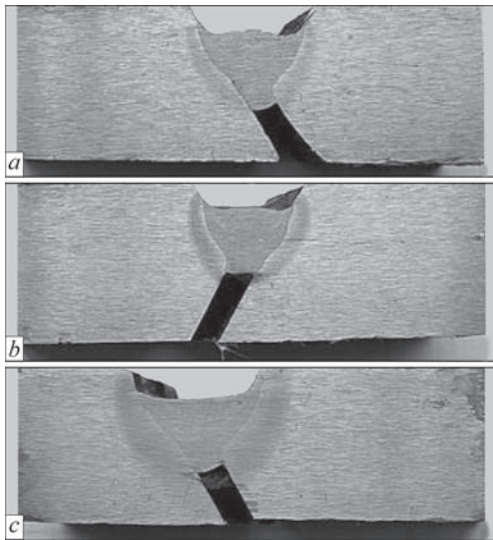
Macrosections of welded joints of Tekken samples of 06G2BDP steel, produced: *a* — with the solid-section NiMo1-IG wire in a gas mixture of 82 % Ar + 18 % CO₂; *b* — with the flux-cored Filarc PZ 6114S wire in CO₂; *c* — with coated ANP-10 electrodes
